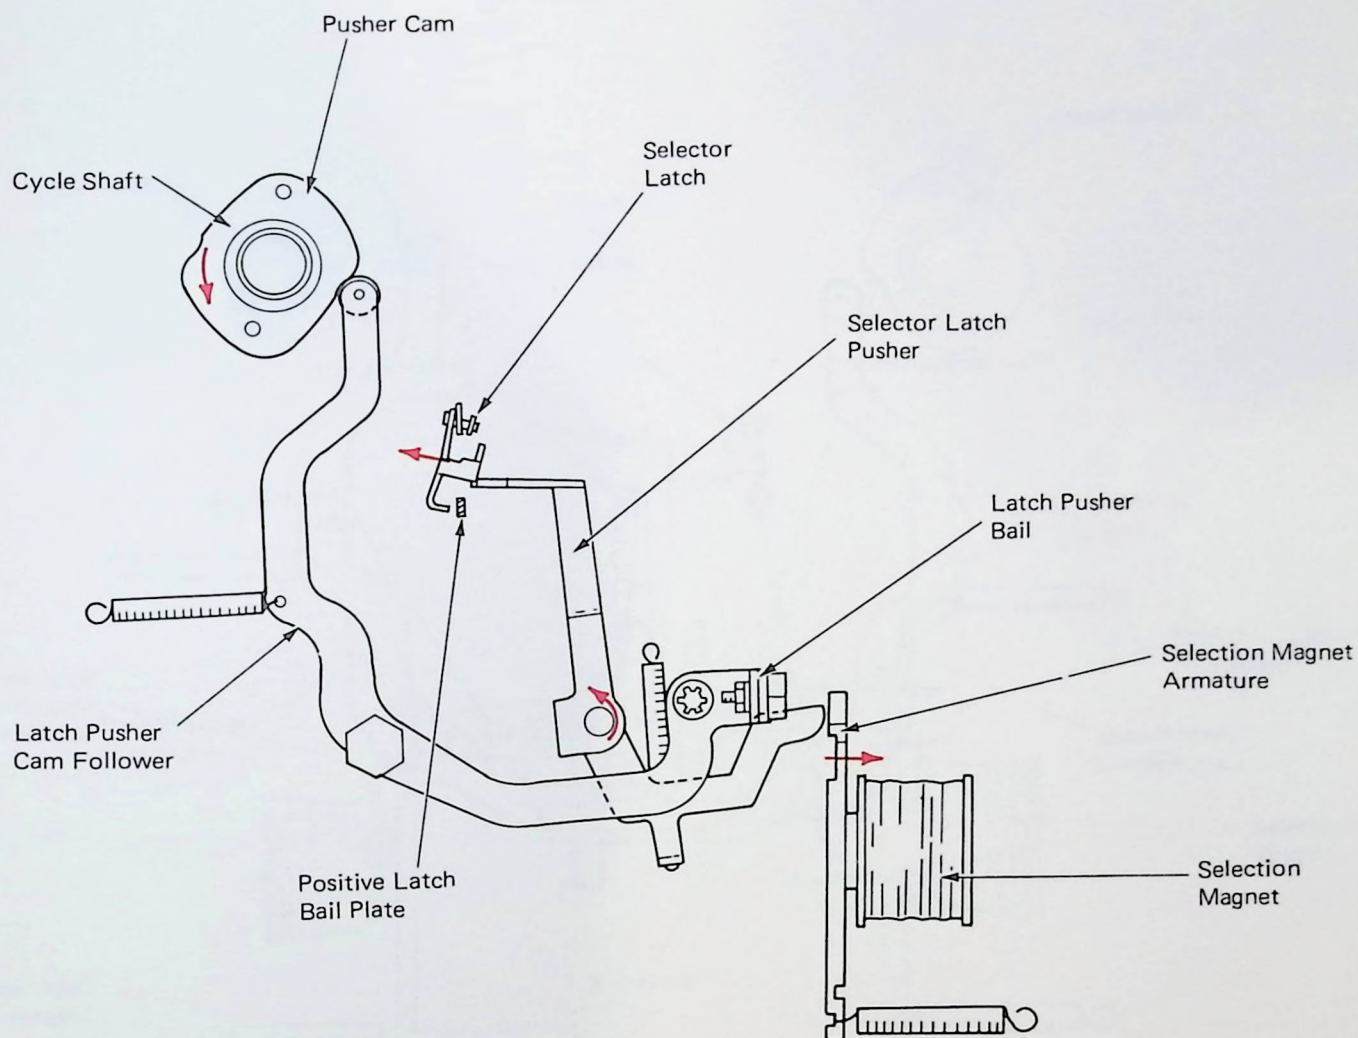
Selector Latch Pusher Selected (Right Side View)
